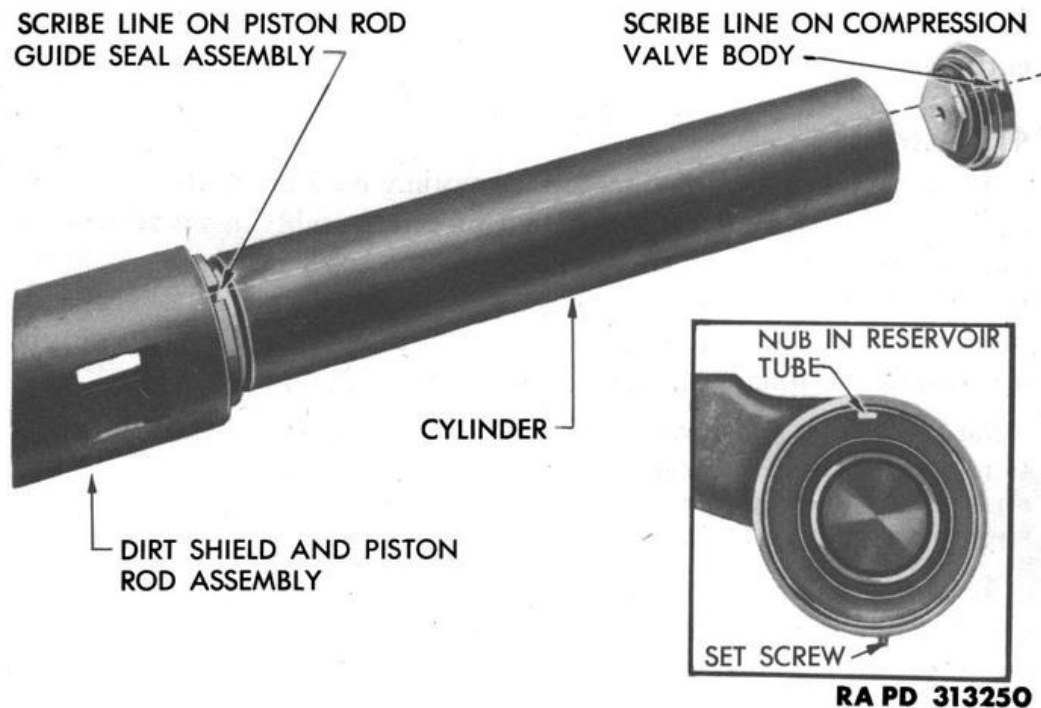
Scribe line on rod guide seal assembly and compression valve body.
